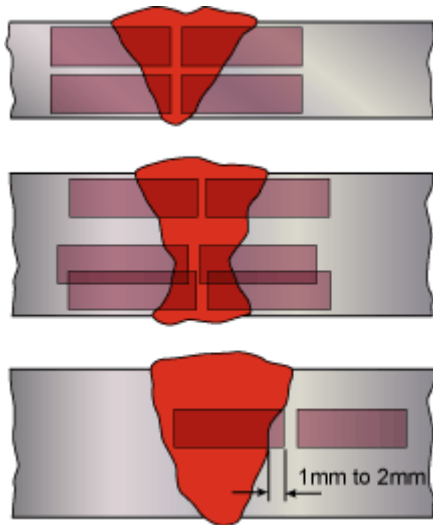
PD5500 App D. location of Charpy specimens in weld HAZ
